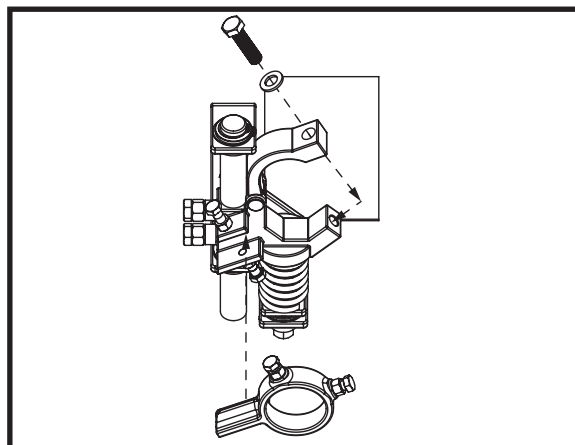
Martin® P2 Secondary Belt Cleaner HD
